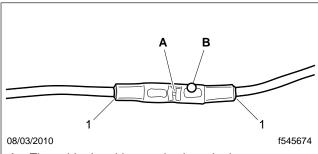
, Wrong Tool Being Used and a Crimp That Will
